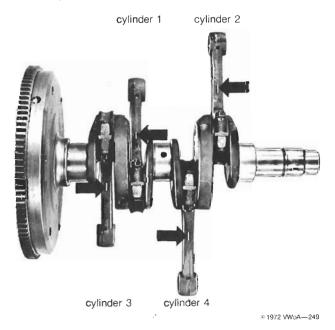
Connecting rod installations. Forged marks at arrows must face upward when crankshaft is positioned as it is in the engine.
